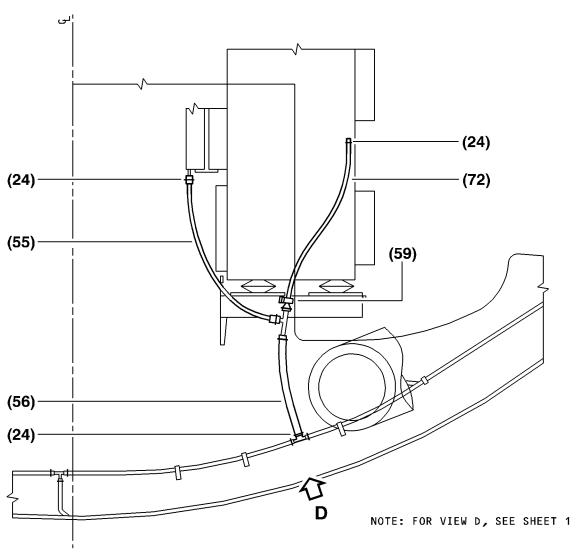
Sheet 2 Removal of the Existing Drain Tube, Config. 08
